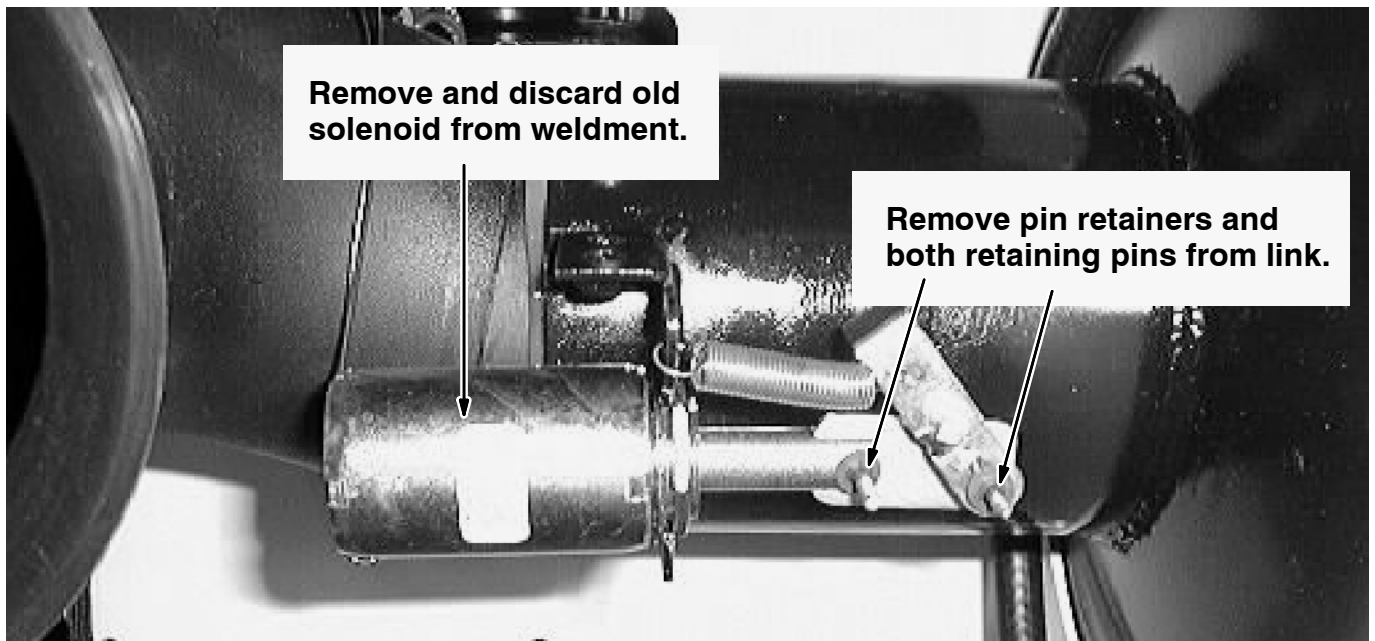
DAMPER SOLENOID REMOVAL, 6200
